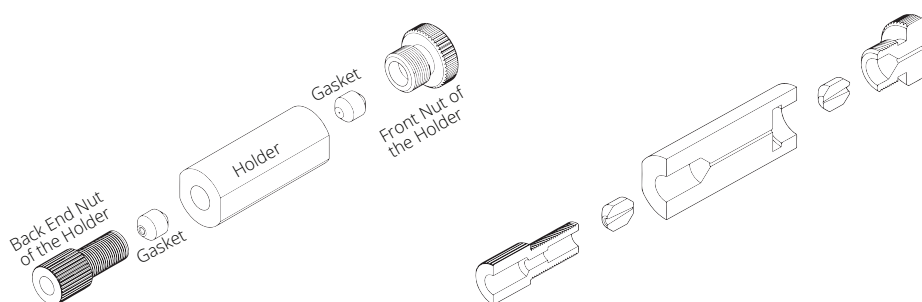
The NFINHLD holder has a gasket at each end with a narrow opening. As shown in the cutaway view, the wide opening of the gasket faces the end nuts, and the narrow opening of the gasket points toward the holder.
